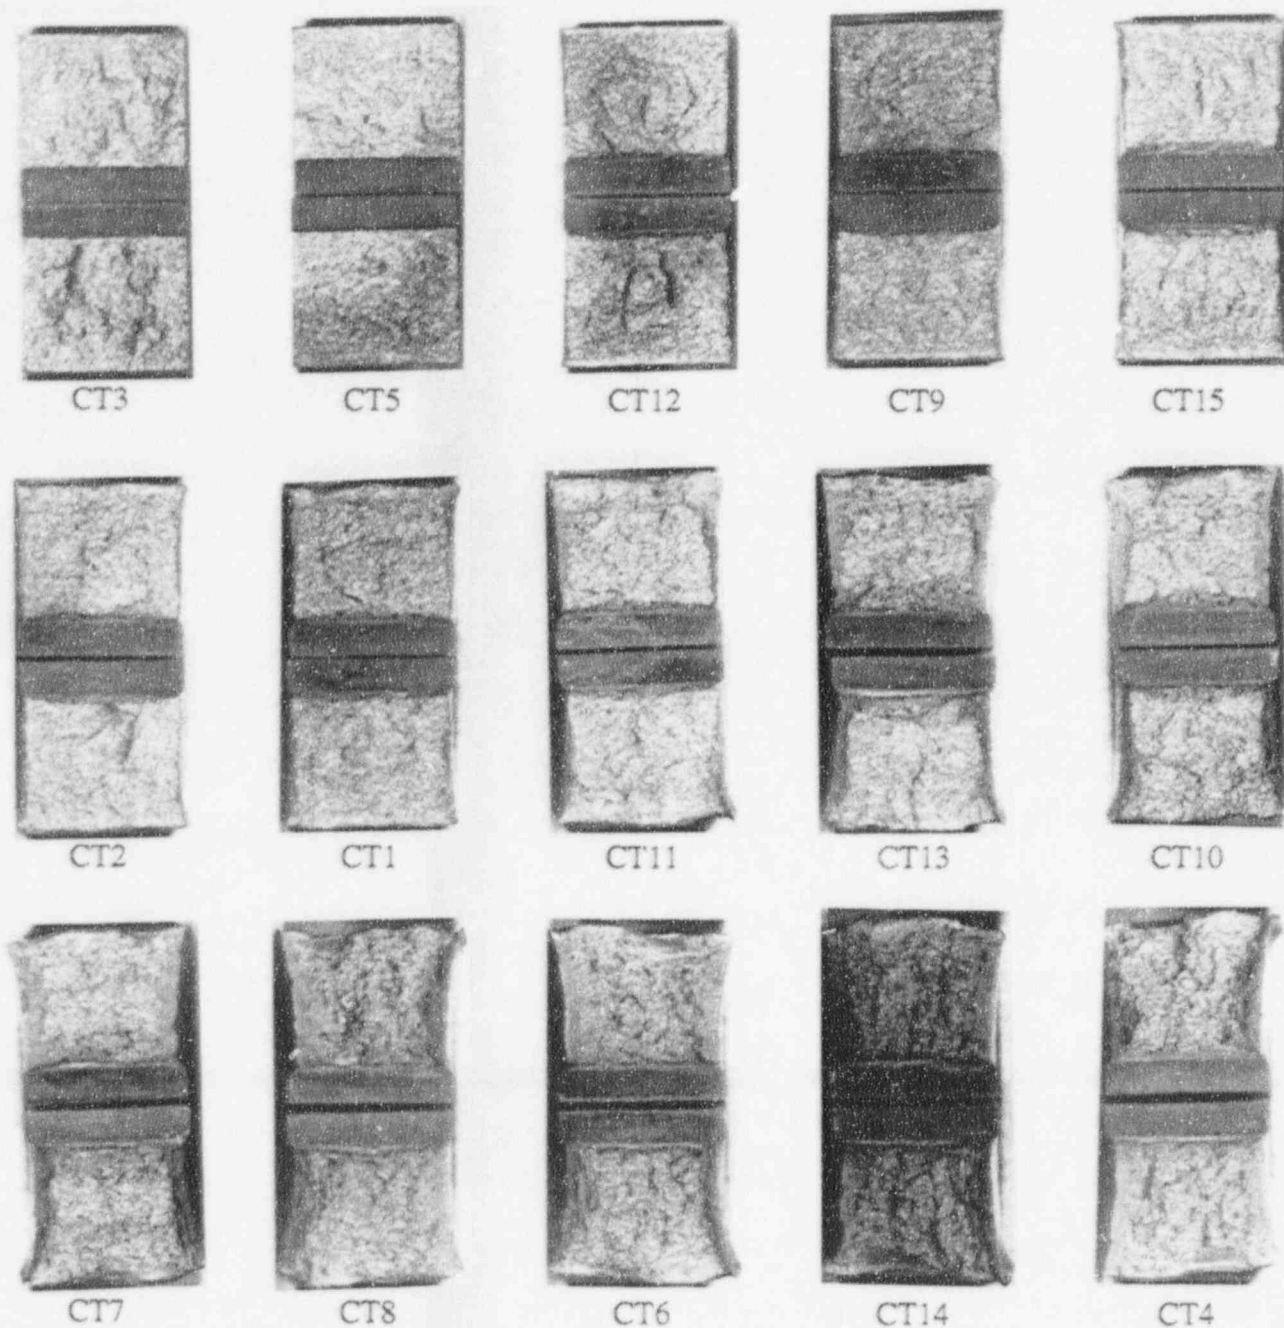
Charpy Impact Specimen Fracture Surfaces of the CPSES Unit No. 2 Reactor Vessel Intermediate Shell Plate R3807-2 (Transverse Orientation)
